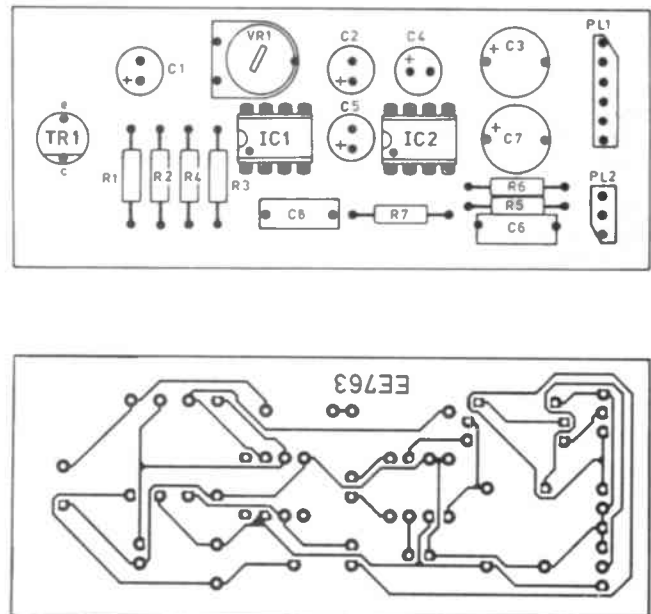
Optical Receiver p.c.b. copper foil and component layout.
